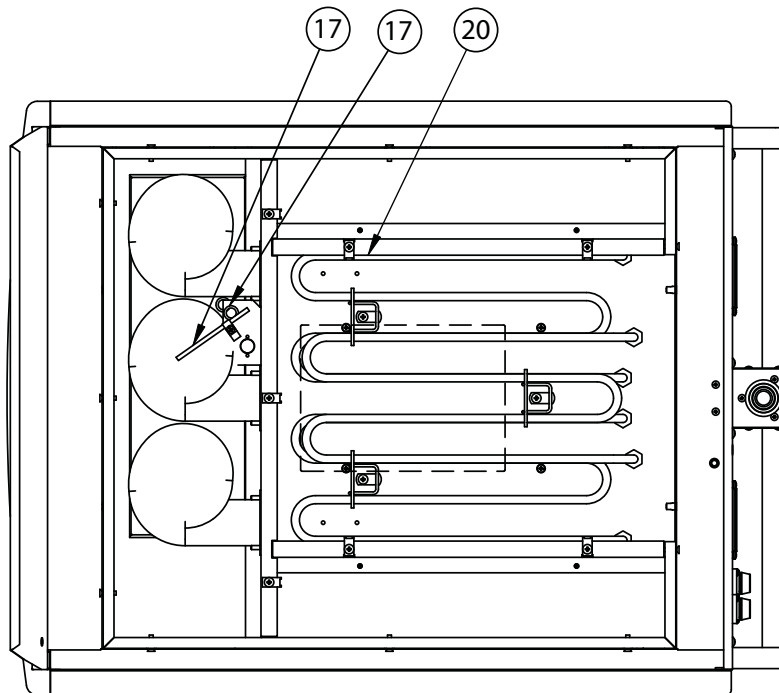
; Bottom of Hot Unit, Cover Removed
